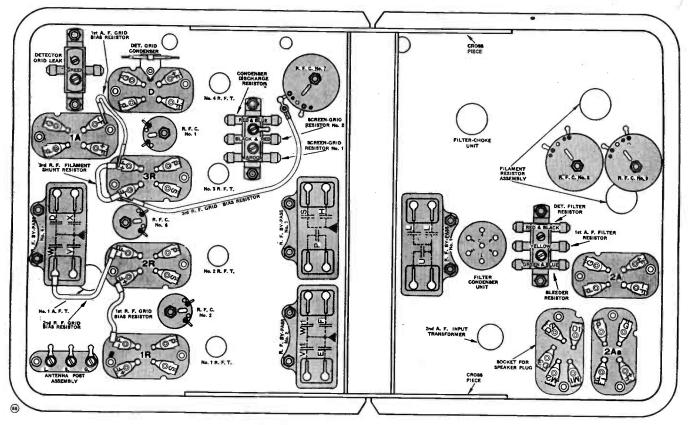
BOTTOM VIEW OF TYPE D CHASSIS. In later-type D chassis, a line fuse (2 amperes) is mounted at the right of R. F. by-pass No. 1.
